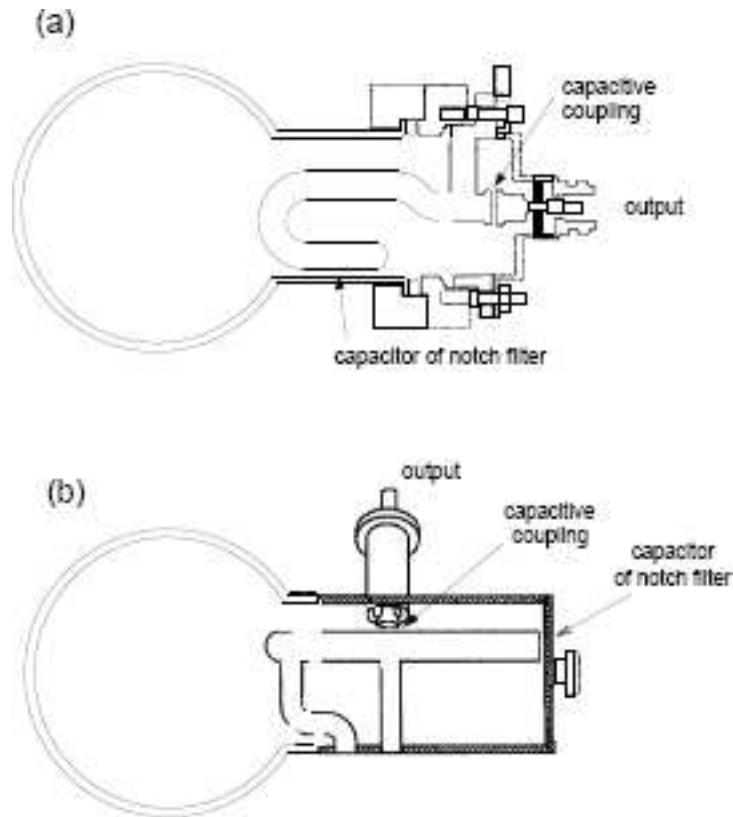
HOM couplers installed at either side of the TESLA cavities (courtesy N. Baboi). Two types are used at the TTF cavities: (a) a demountable Saclay type and (b) a welded DESY type.
